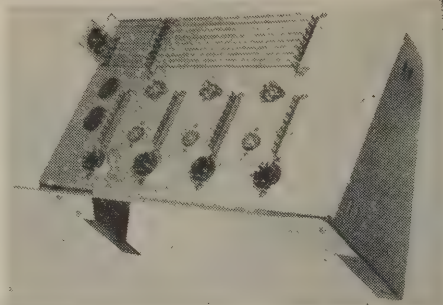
The assembled breadboard chassis, showing the placement of tube sockets, terminal strips, bus bars, and power connector. The end wings of the aluminum control panel, which is bent outward at an angle of 30°, so that it appears practically invisible in the photo, are seen near the bottom.
